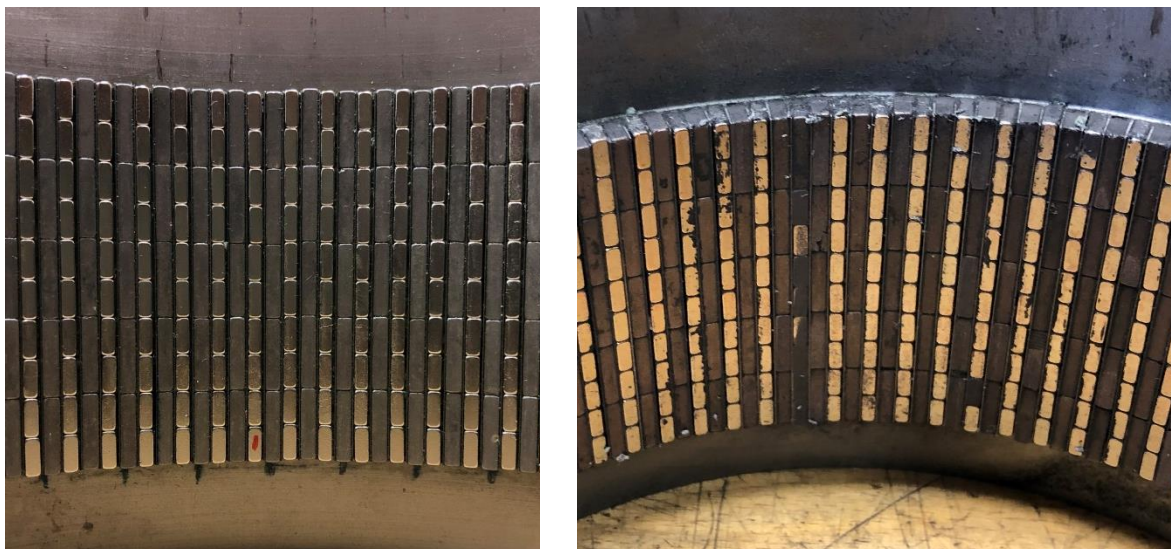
Section of the rotor showing the effect of a finishing cut using EDM
